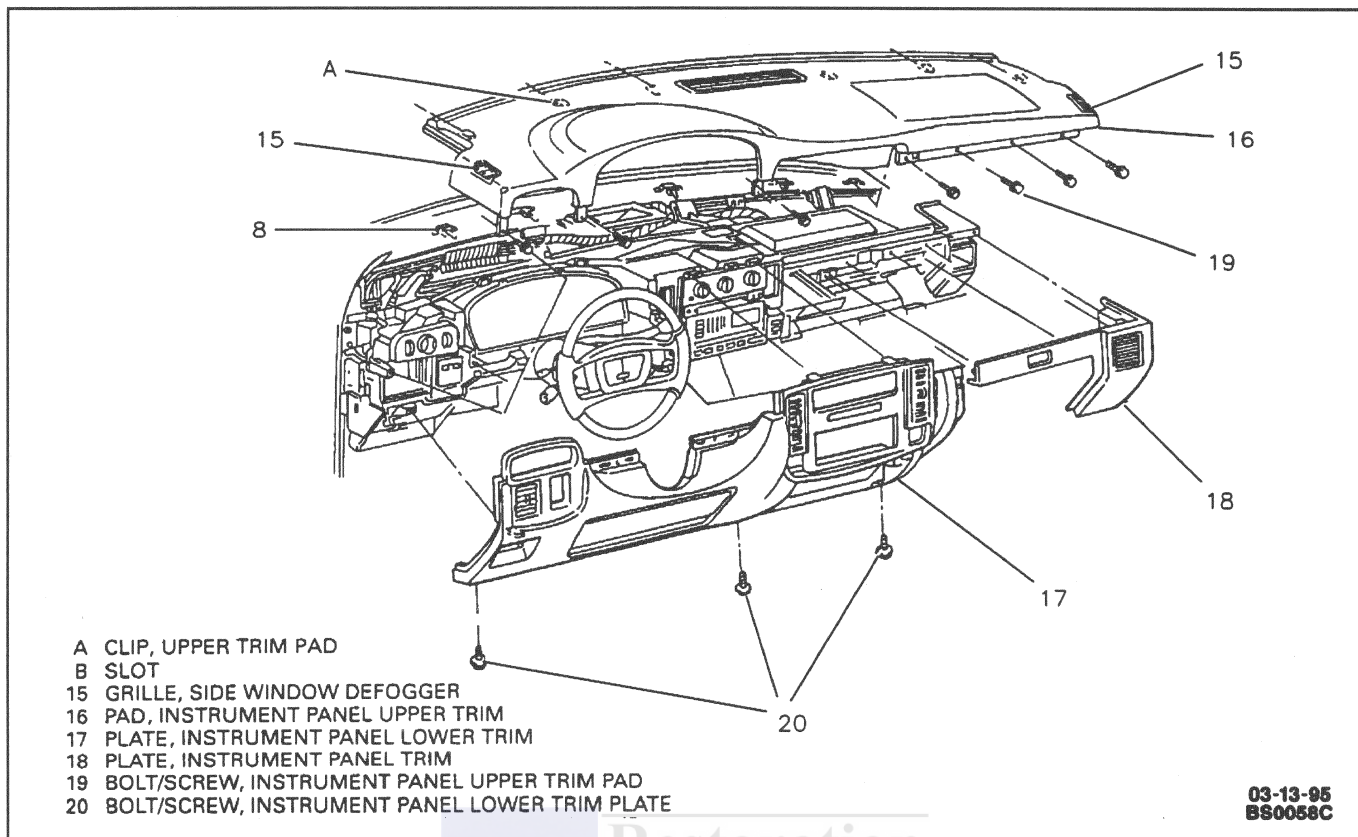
Upper Trim Pad, Lower and Right-Hand Trim Plates - (Chevrolet)
